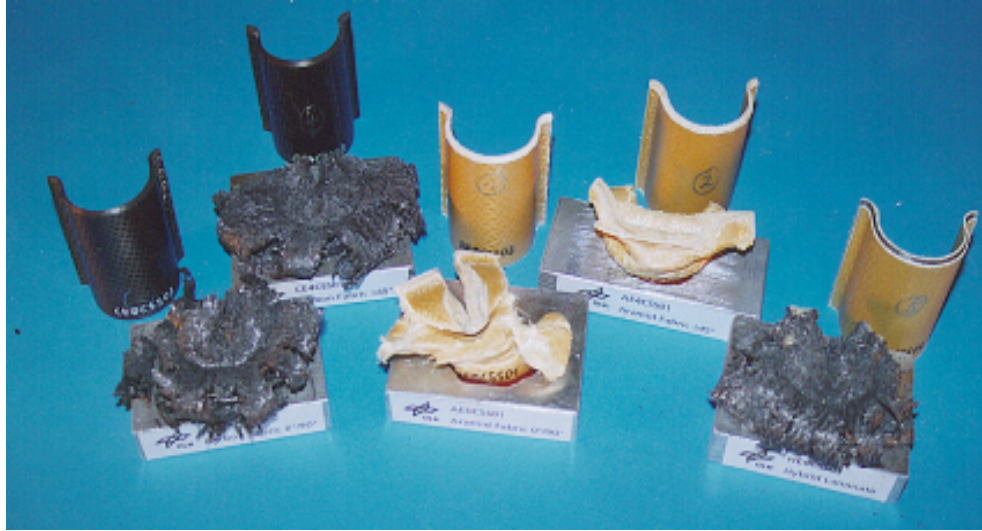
Crushing behaviour of different tube segment specimens [176]
